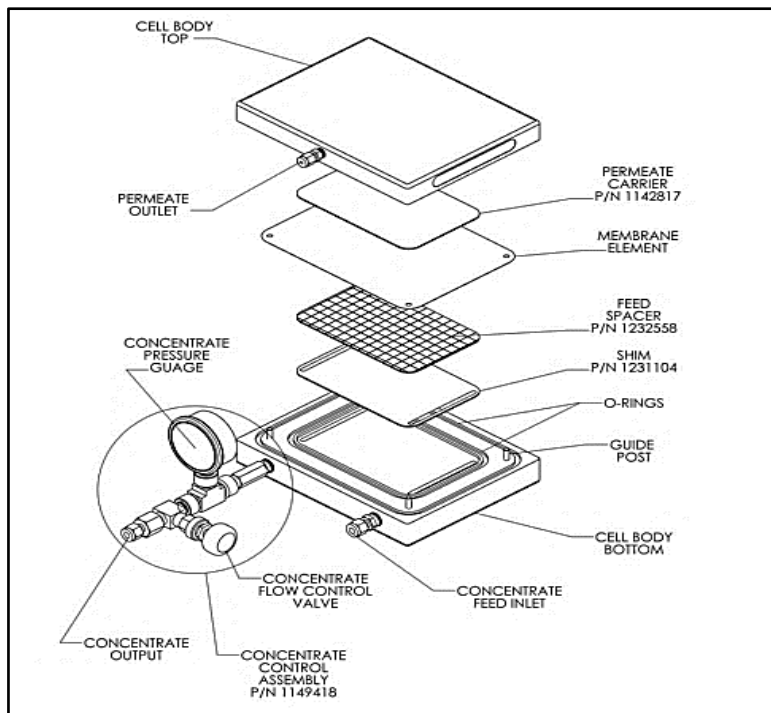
Cell Holder Assembly (Sterlitech, 2017b)
